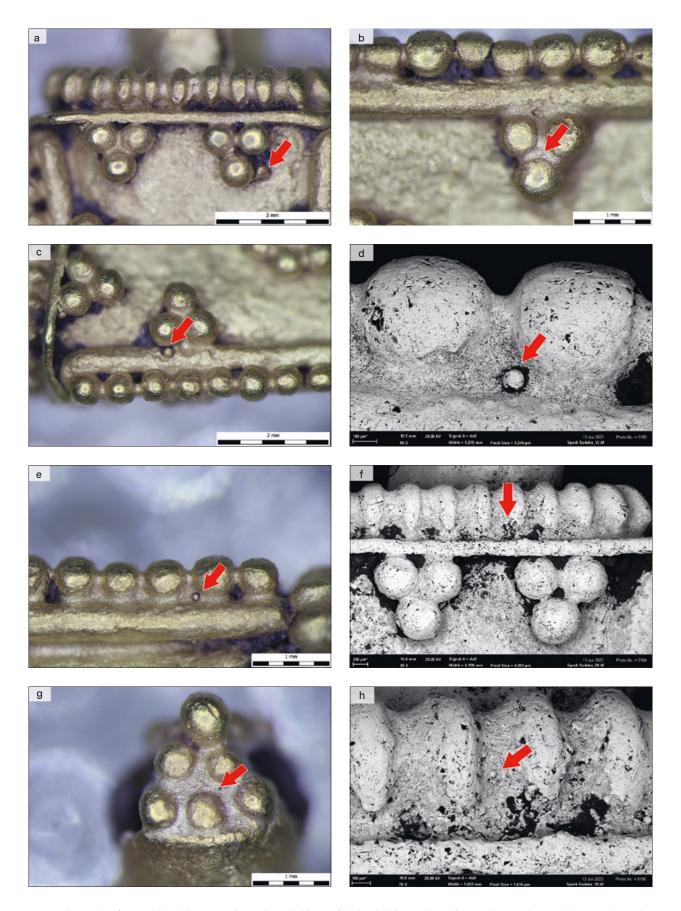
The pendant from Sadská: soldering. – a the partly melted lump of the hard solder. – b the solder area between the granules. – c-e the patch of the hard solder having formed a sphere but not having fused with the substrate. – f-h the partly melted fillings of the hard solder. – g the solder area between the granules forming a pyramid on the suspension system. Note the silvery color of the solder which reveals a high percentage of silver in the hard solder. – (Photos E. Ottenwelter; micrographs J. Čupera).
